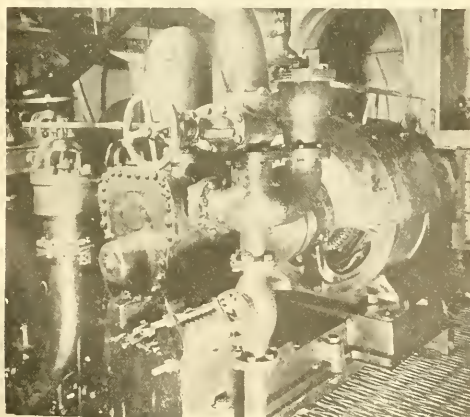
MOTOR DRIVEN LUBRICATING OIL PUMP
